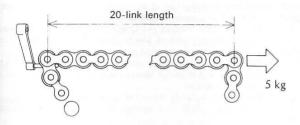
Measuring starter drive chain - KLT200 and 250 (Sec 17)
